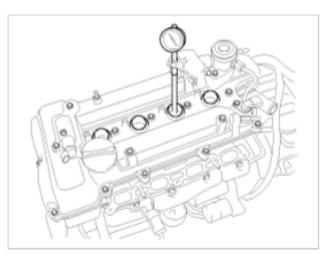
Checking Cylinder Compression Pressure Using Compression Gauge Courtesy of HYUNDAI MOTOR AMERICA
